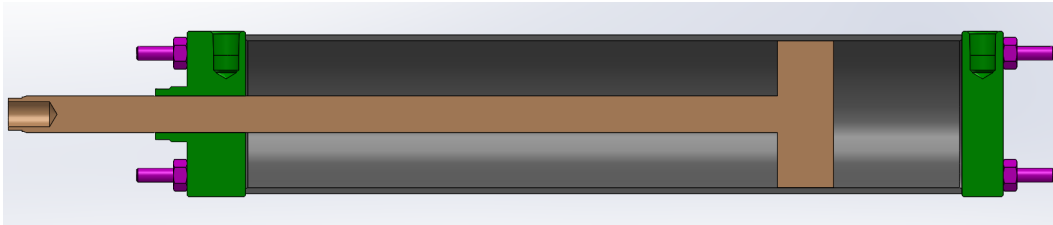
3D section view of the piston, provided by Parker Pneumatic [Pneumatic, 2014]. The piston body is gray, piston head and shaft are tan, end caps are green, and tie rods are pink.
